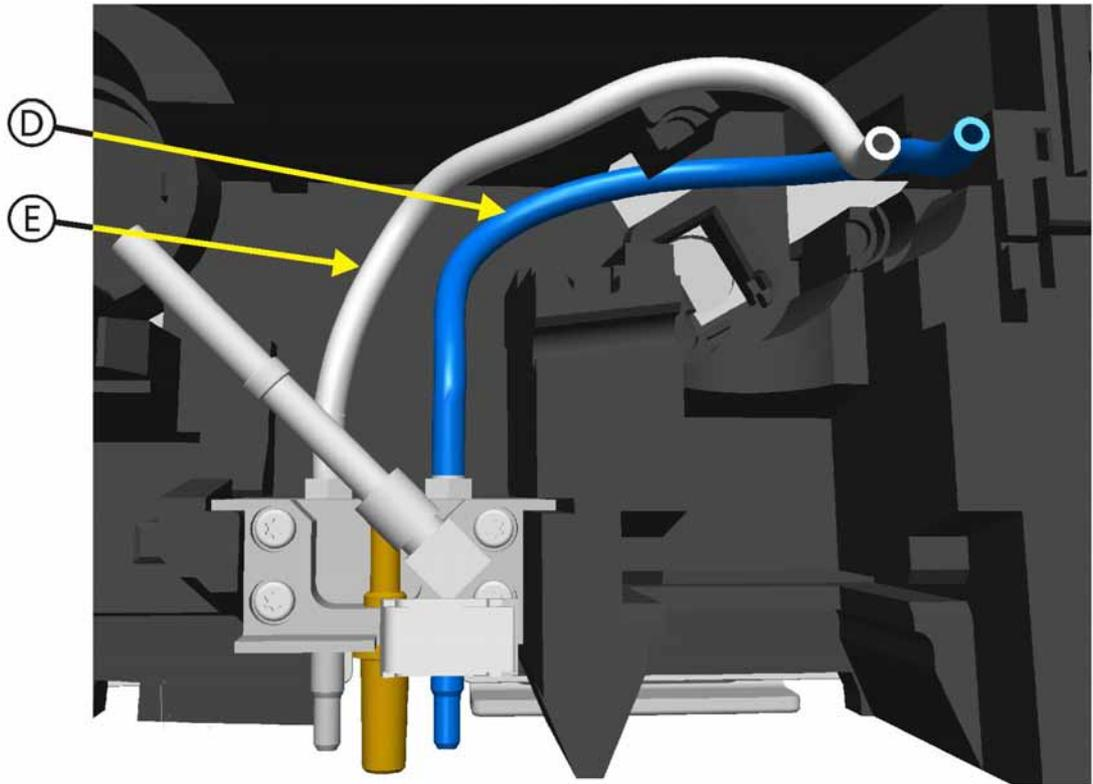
Front Panel Connector Block and Tubing Assembly, Step 2
